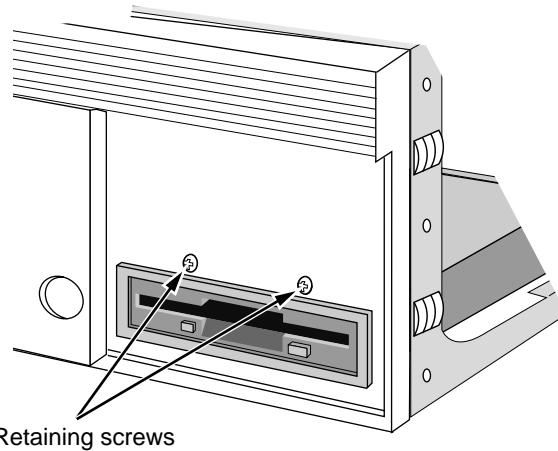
Floppy Disk Drive Retaining Screws in the 8-Slot Chassis
